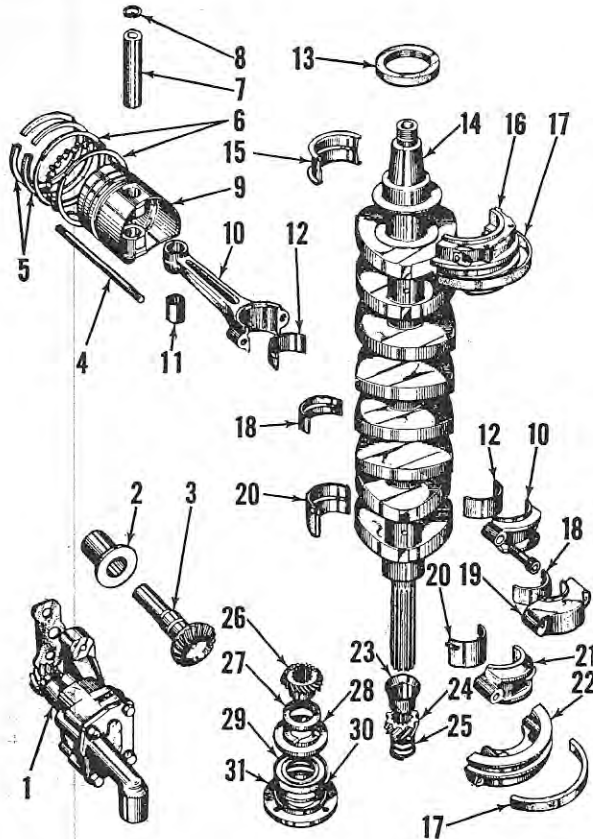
Exploded view of crankshaft, bearings, pistons, connecting rods and associated parts.
